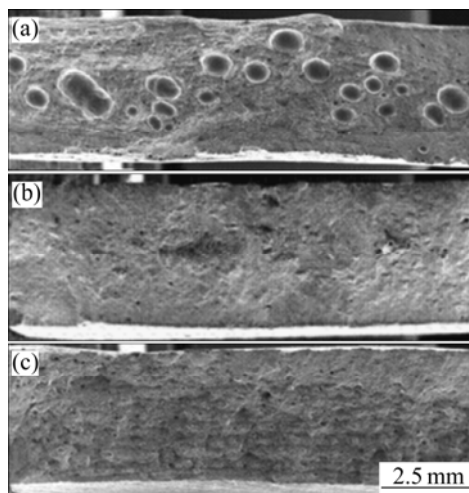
Macro-fracture morphologies of tensile samples: (a) Dissymmetrical “X” cross-section; (b) Symmetrical “X” cross-section; (c) Consistent “H” cross-section
